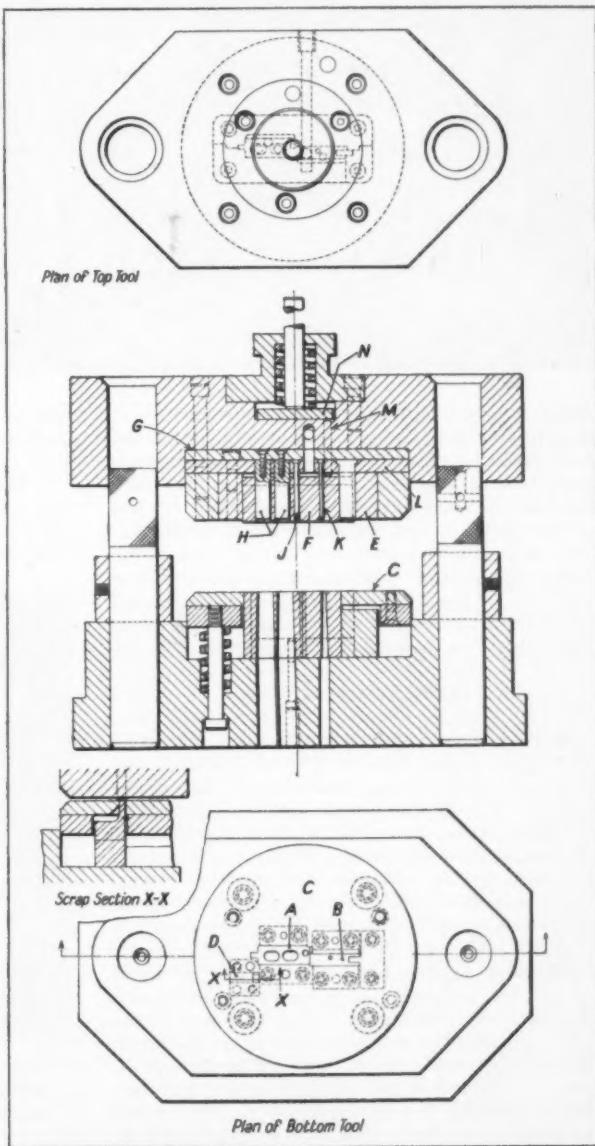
This Compound Tool is Employed to Produce Key Stems for Sunlock Figureflow Machines at an Output Rate of 63 per min. Since Close Tolerances are Specified for Thickness, Strip Material is Used
